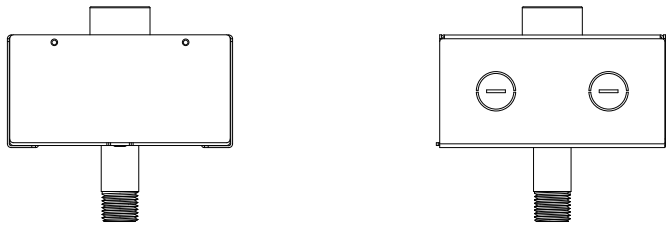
If fixture has sensor receptacle installed, screw the 1/2" knockout out with screw driver by illustrated direction, and screw the sensor kit on. The sensor is set as universal mode(refer to sensor spec sheet), the setting is program mable via remote control(the remote control is not included in standard packing
